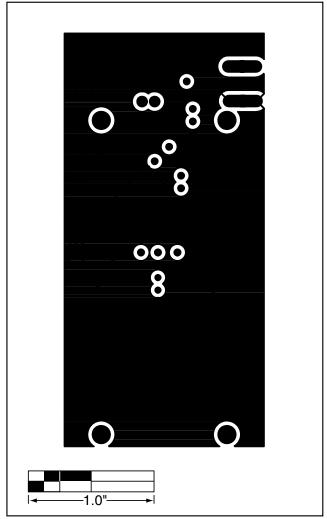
MAX3971 EV Kit PC Board Layout—Power Plane
